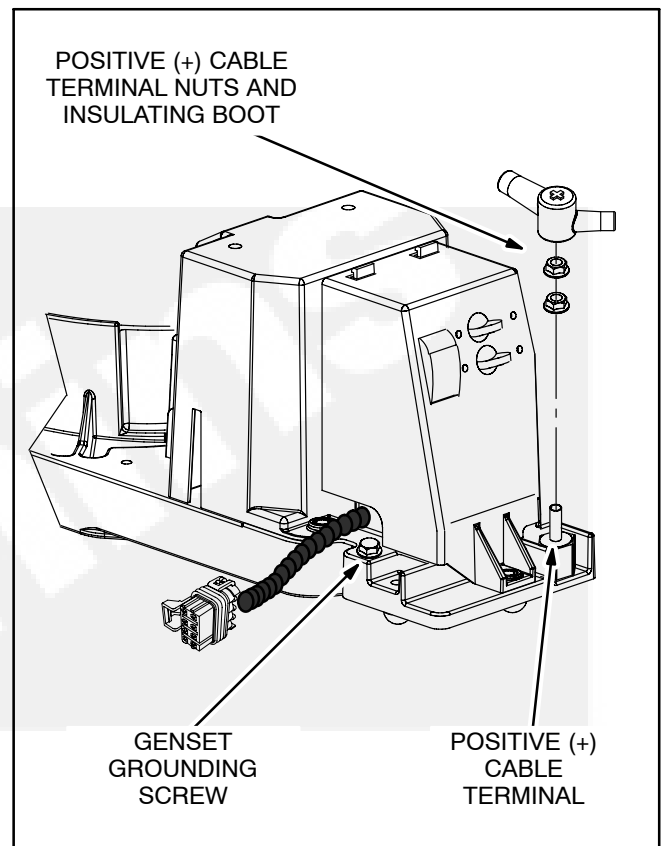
POSITIVE (+) BATTERY CABLE TERMINAL & GENSET GROUNDING SCREW
